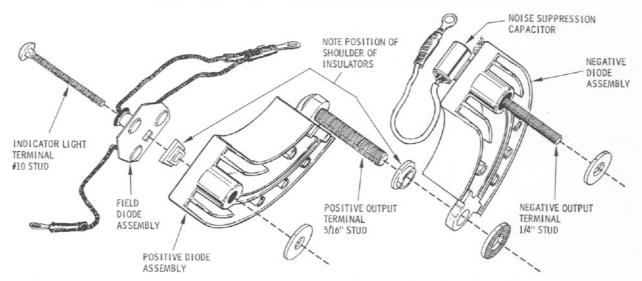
REMOVING FIELD DIODE ASSEMBLY
